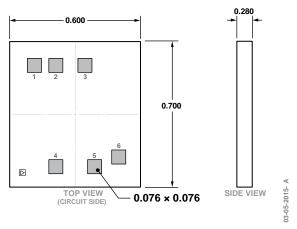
6-Pad Bare Die [CHIP] (C-6-7) Dimensions shown in millimeter
